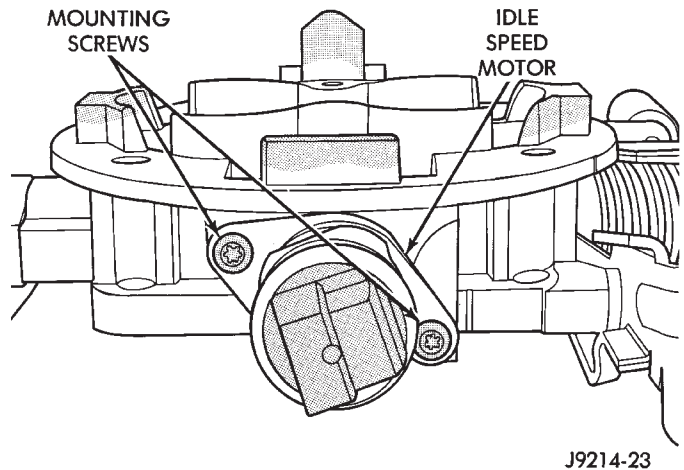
Mounting Bolts (Screws)—IAC Motor—5.2L Engine
